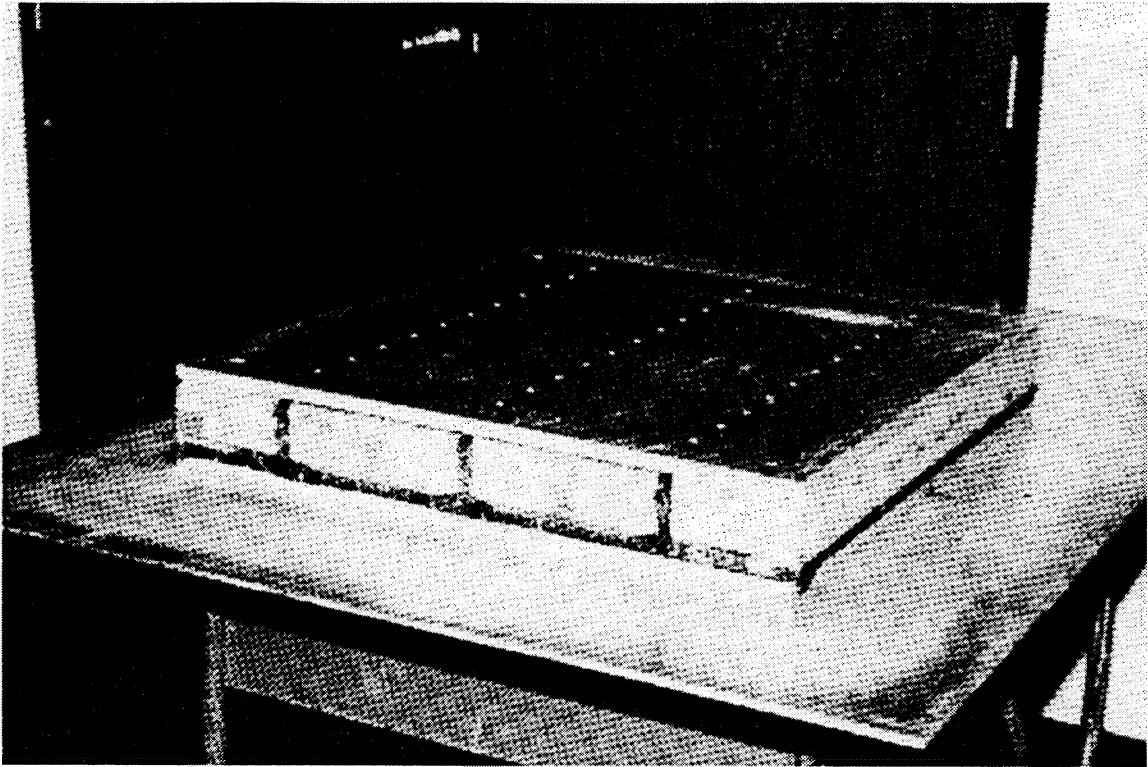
Complete three blade stiffened tooling assembly, prior to bagging.
